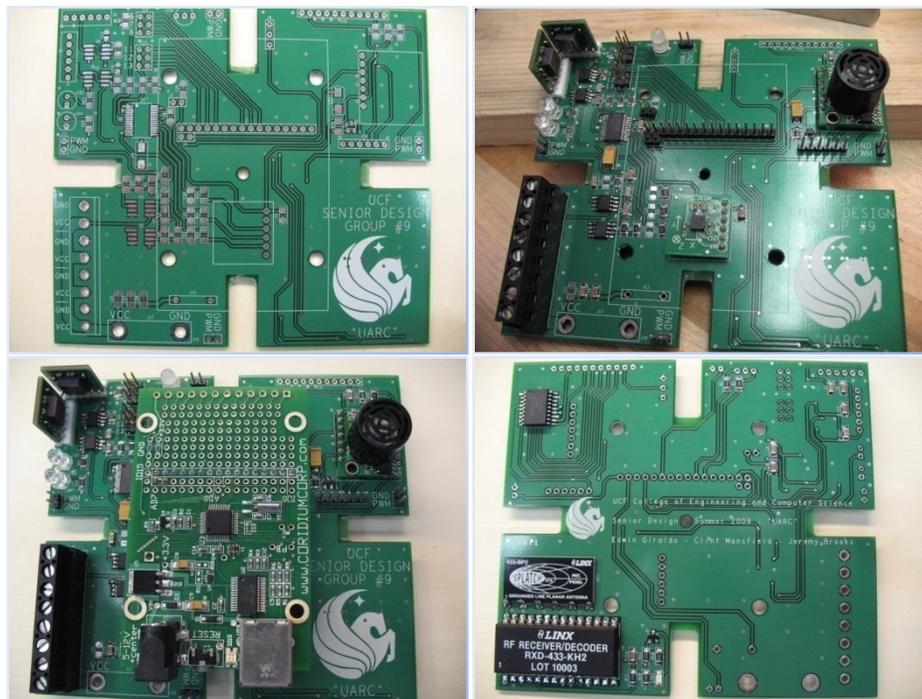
Pictures of the PCB created for the UARC. The fabricated board, mounted sensors, mounted development board with microcontroller, and bottom side of board is shown.
